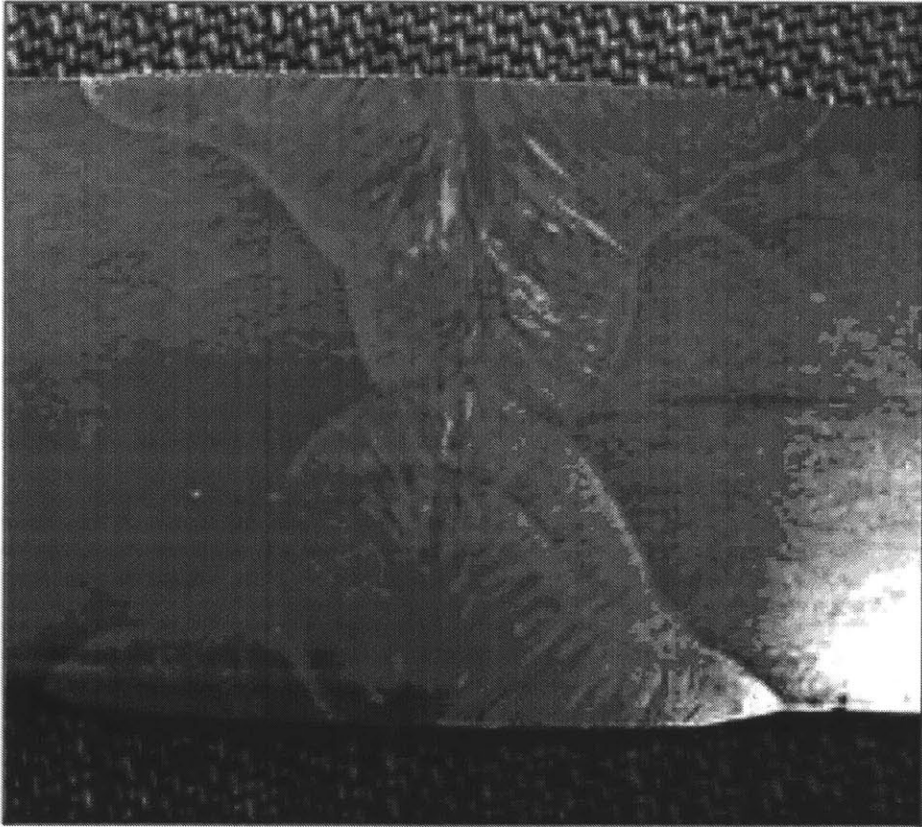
A polished weld specimen showing the geometry of the weld
